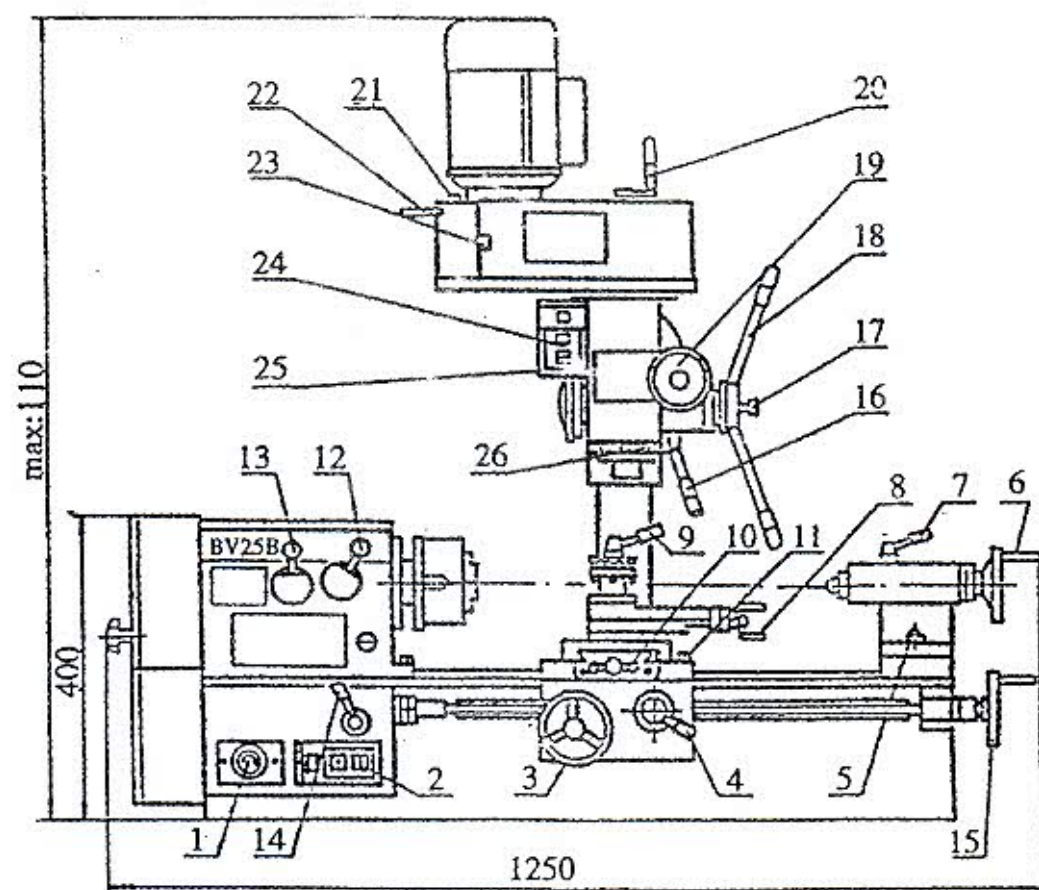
3 OUTLINE DRAWING OF BV25B - 3 MULTI - FUNCTION CUTTING MACHINE
